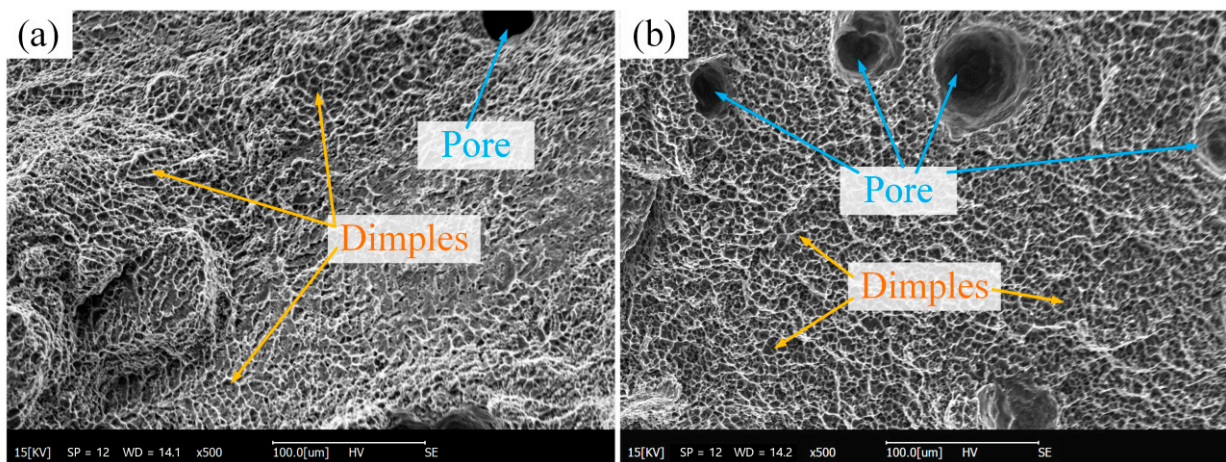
Fracture morphology (500 \times): (a) tensile specimen H; (b) tensile specimen S.
